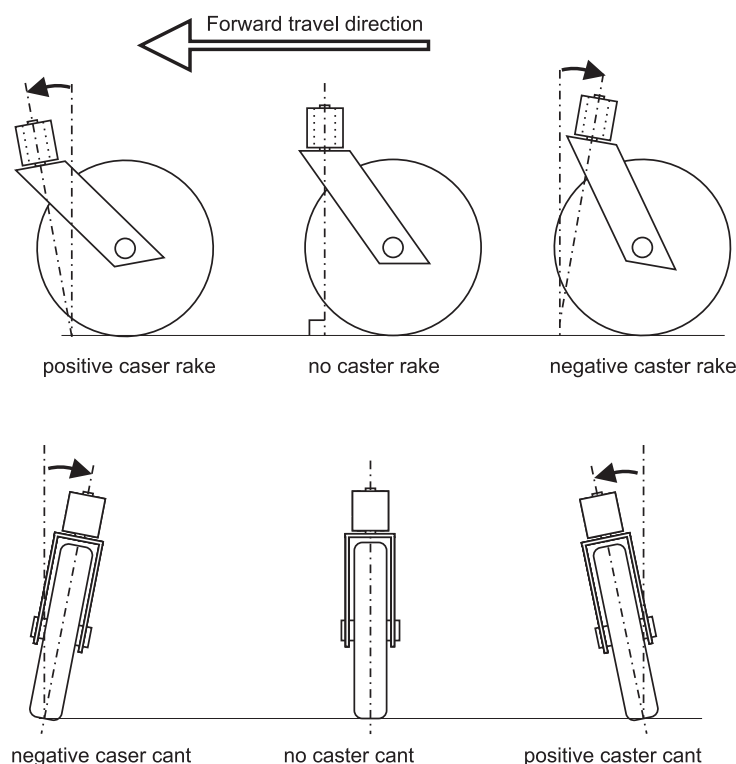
Shows the geometry for the fixing for the non-ideal caster assembly: negative cant brings the stem axis through the vehicle-frame
